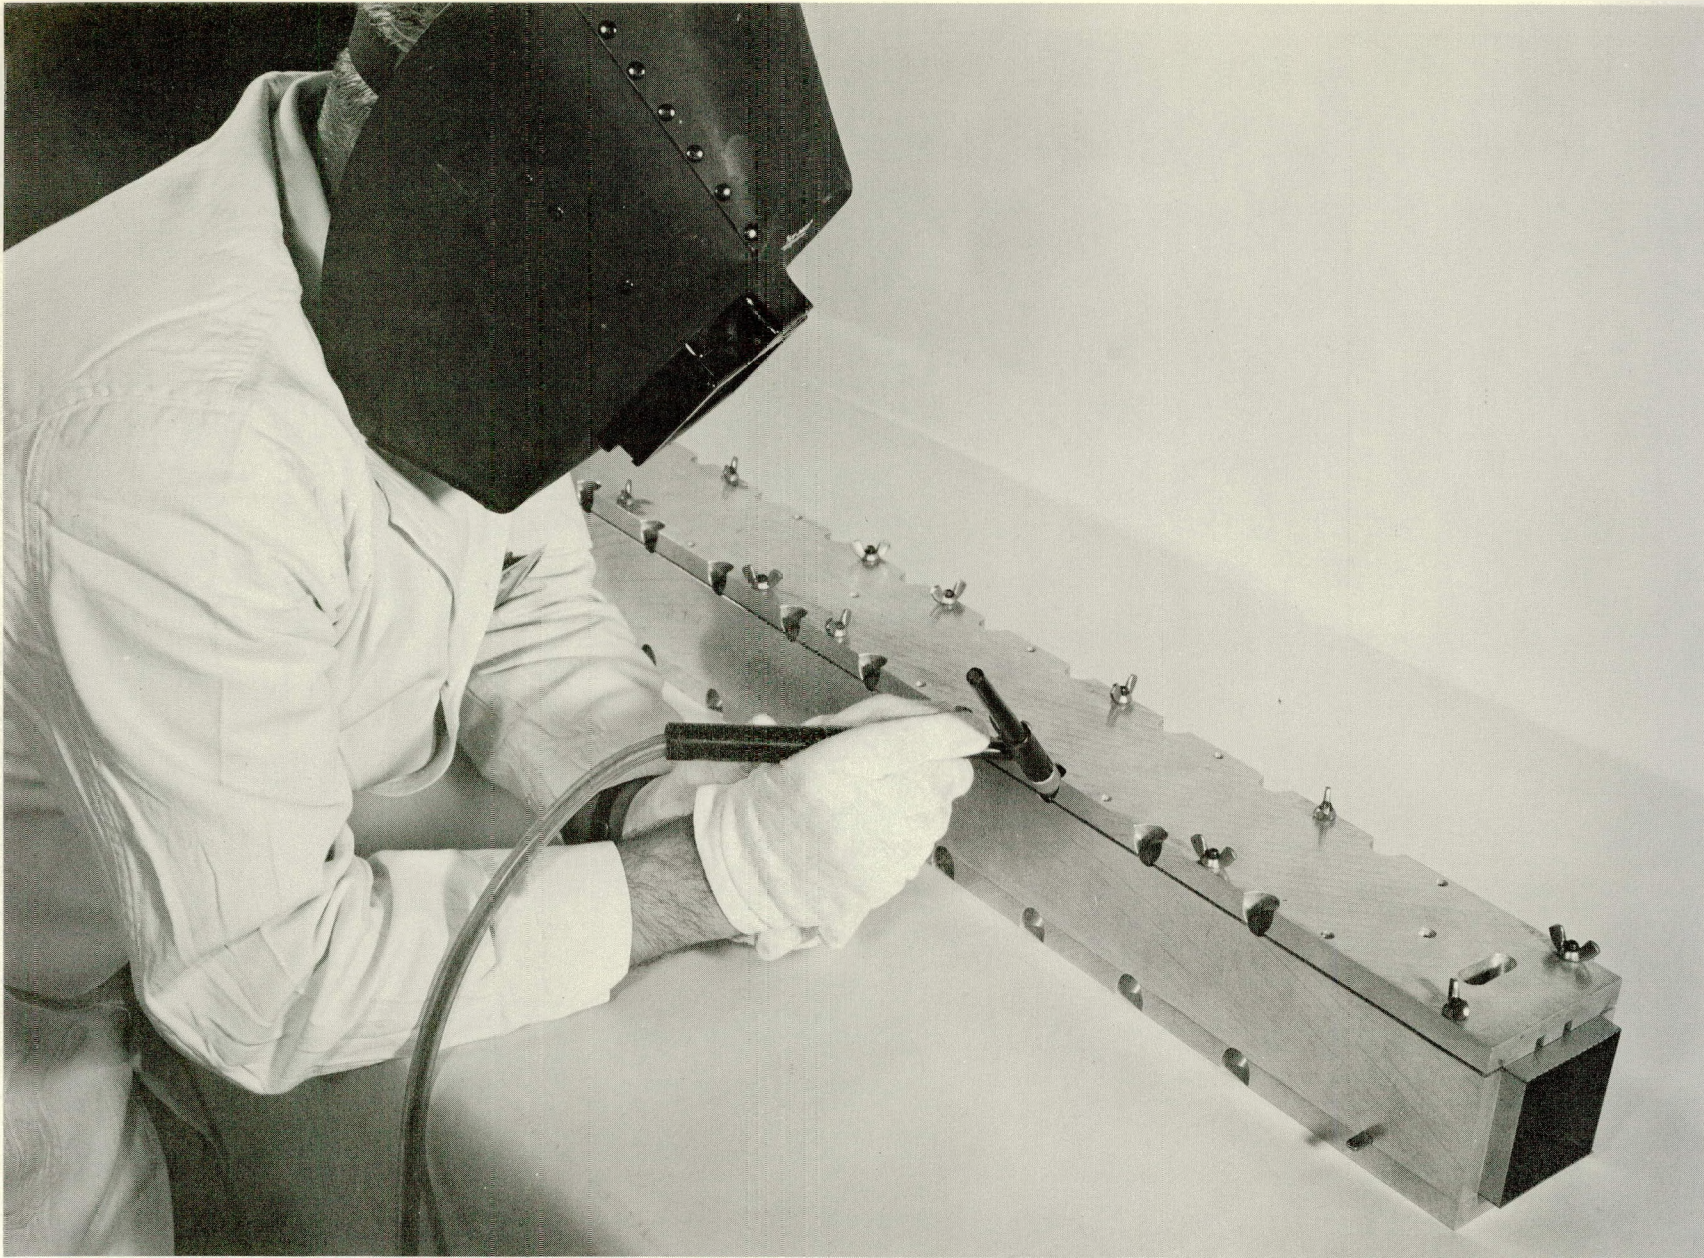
Tack Welding Assembled Fuel Box in Fixture
